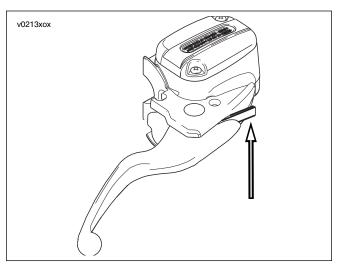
Install 4 mm (5/32 in.) Thick Cardboard Insert
